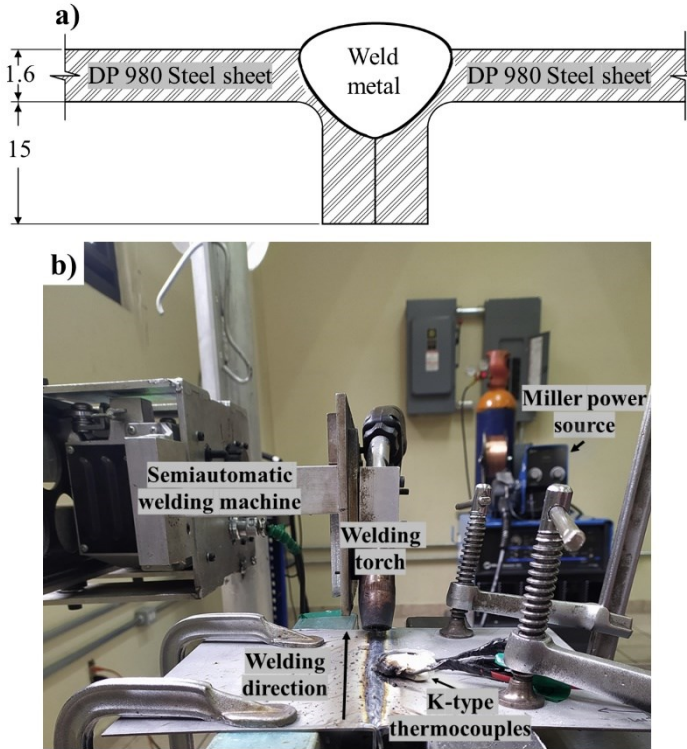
Configuration for welding process of DP980 steel sheets (a) Schematic draw for the joint geometry with a standard flare V-groove preparation, dimensions are in mm. (b) Experimental setup.
